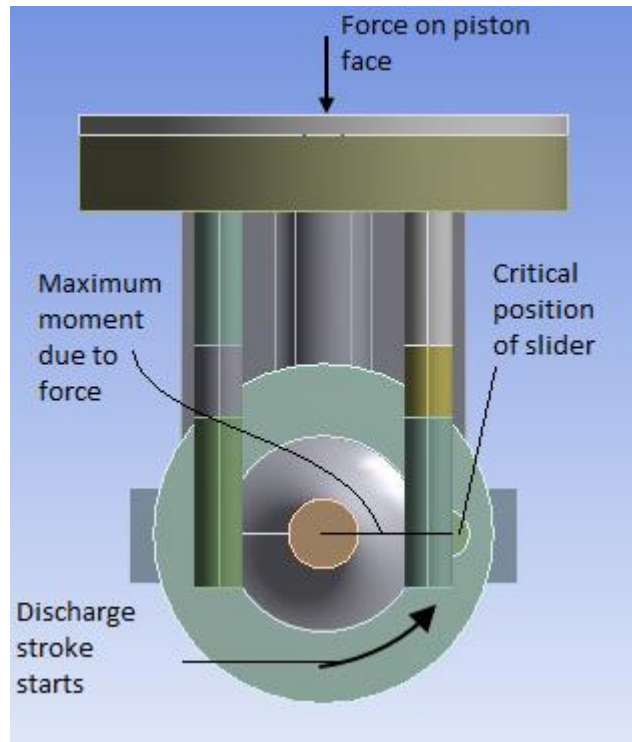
Top view of modelled position of piston-shaft assembly.
